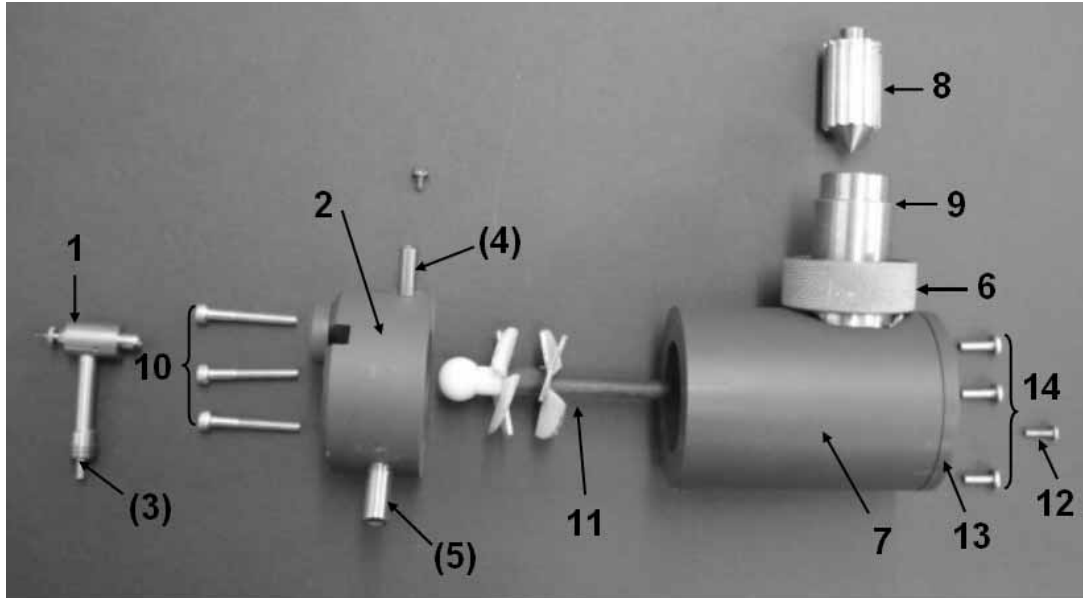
Mixing chamber, nebuliser and burner assembly.
